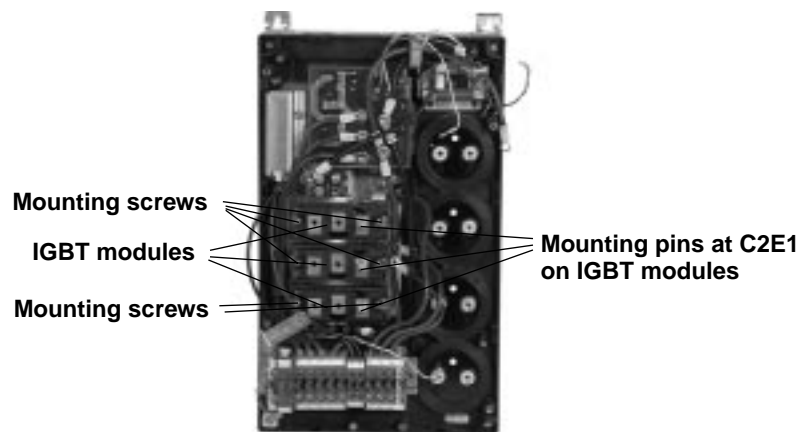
Bus Bar Screw and Mounting Pin Locations
